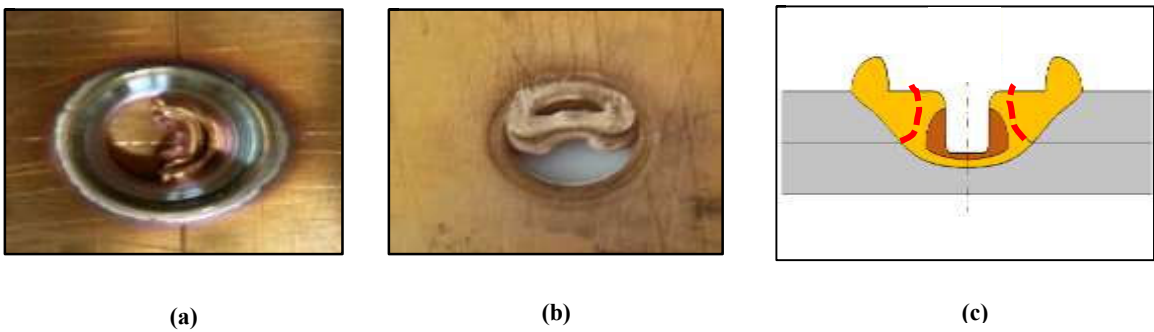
Nugget Pull Out Fracture Mode (a) Top View (b) Bottom View of The Upper Sheet, (c) Pull Out Fracture Mechanism
